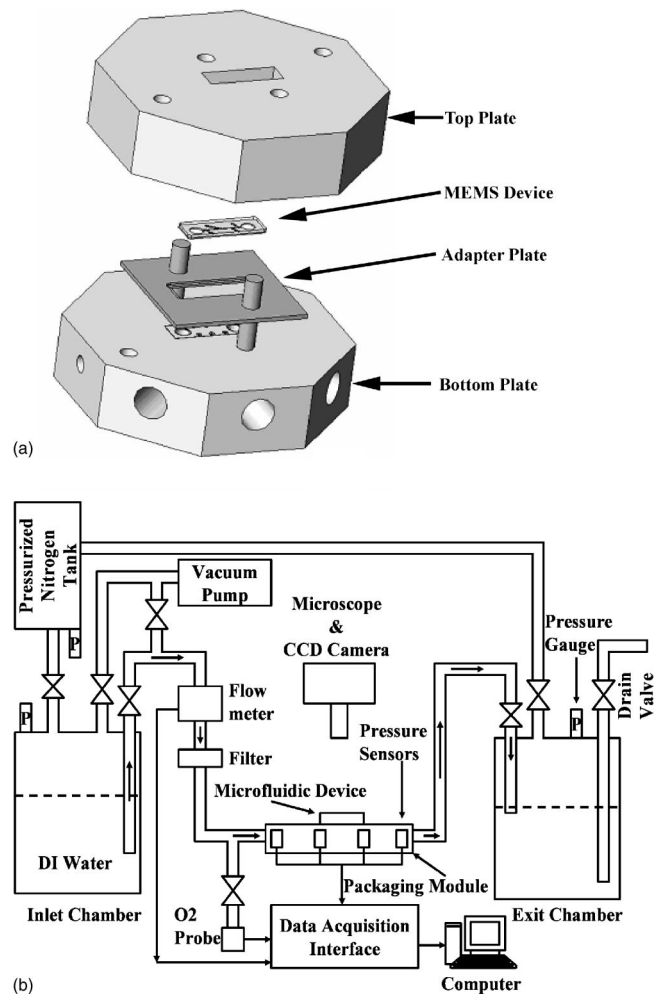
(a) Exploded view of the packaging module assembly. (b) Experimental setup.
